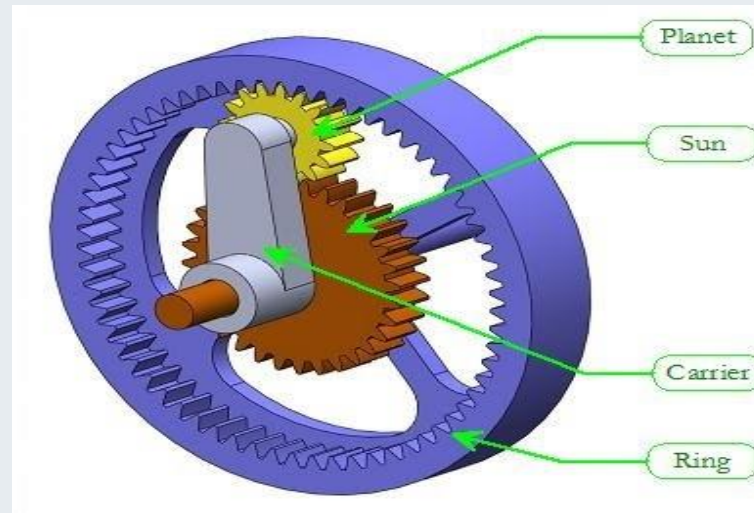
Planetary gear section. source: [www.iqsdirectory.com](http://www.iqsdirectory.com)
